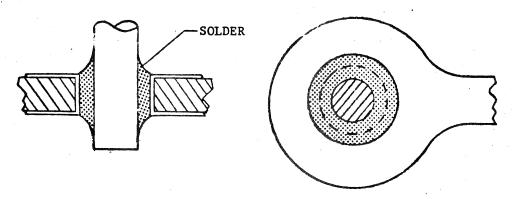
Solding Technique-apply solder to opposite side of lead from the soldering iron
